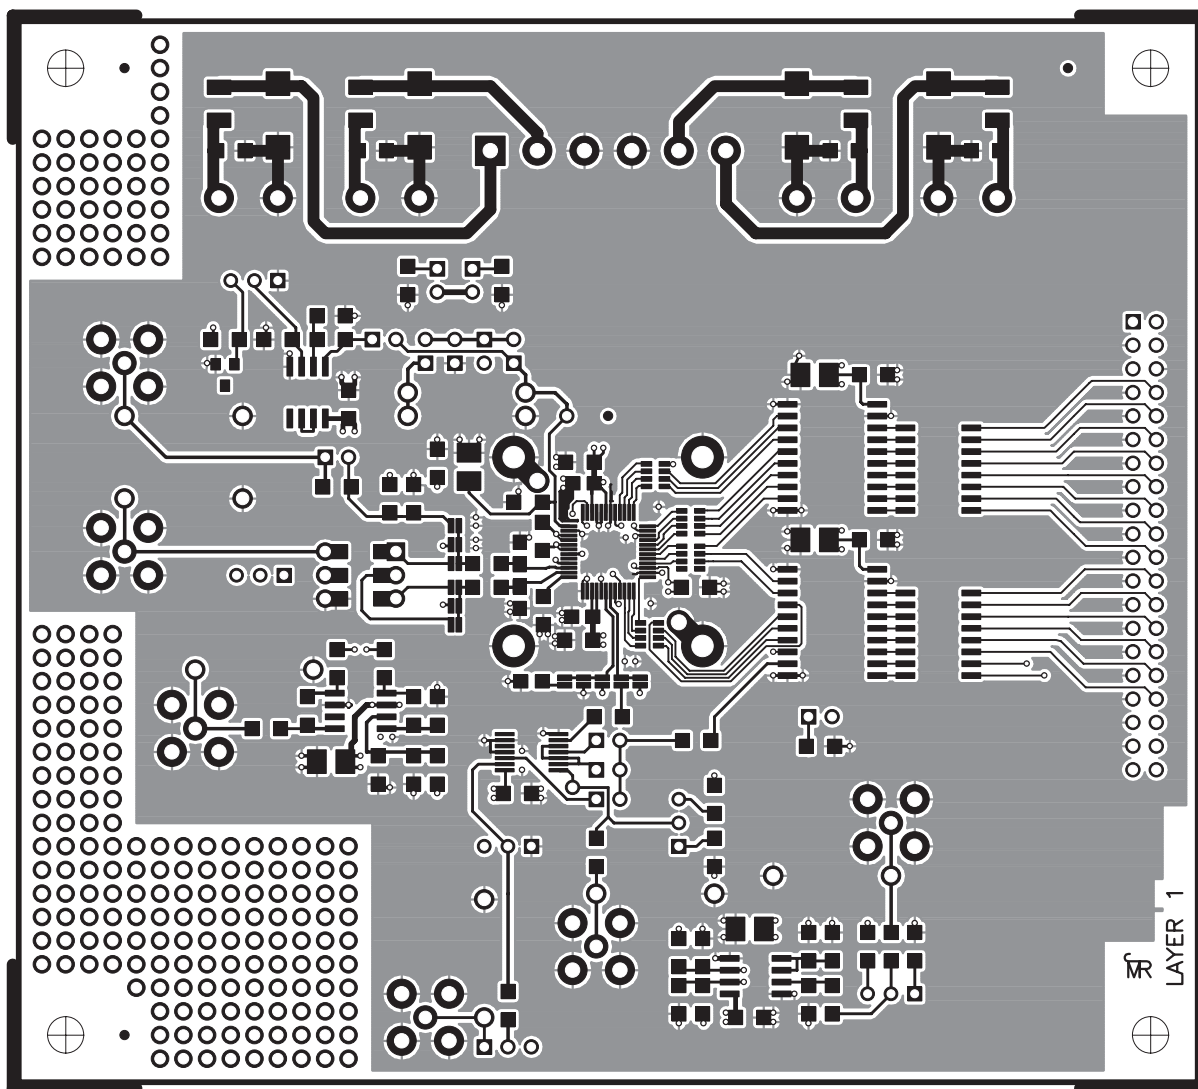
AD9244 Evaluation Board, PCB Layer 1 (Top)
